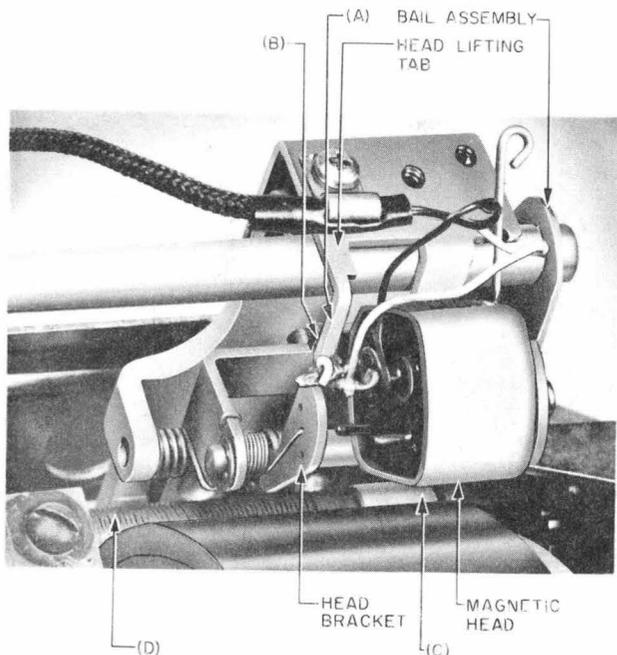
Magnetic Head Lifting Tab Position (Shown in Unoperated Position)
